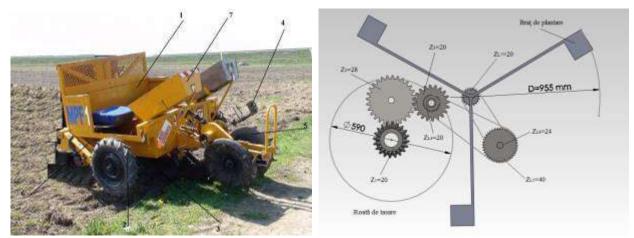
MPF1 seedlings planting machine [3.4] a) Overall view of MPF1seedlings planting machine b) The kinematic scheme of driving the planetary arms
